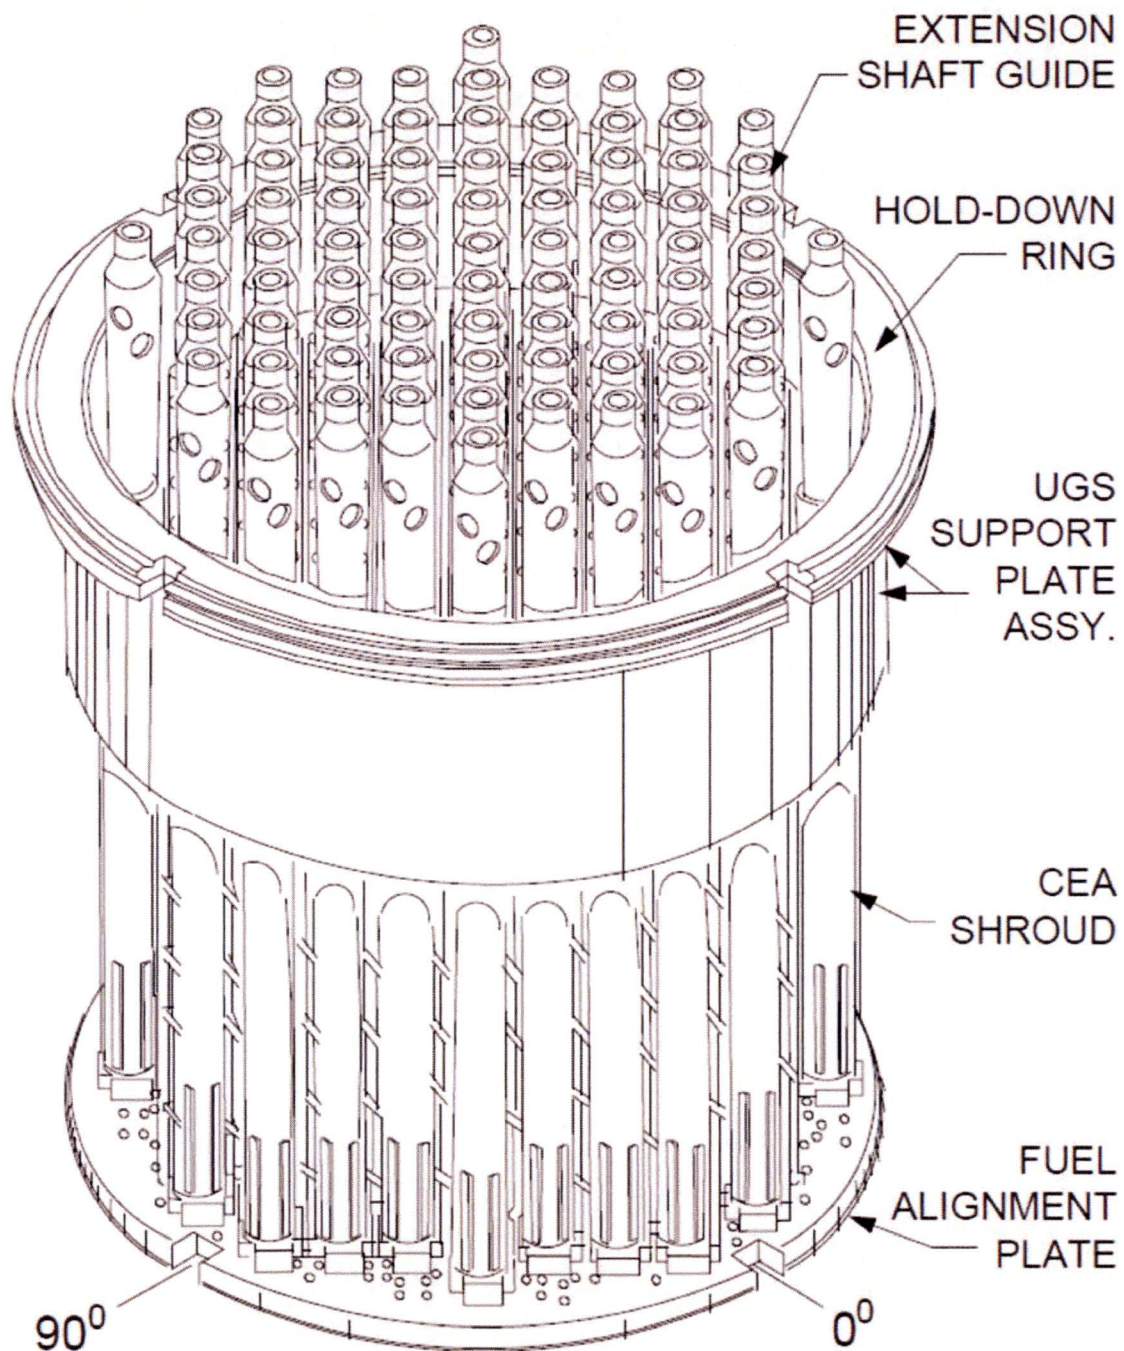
ANO-2 Upper Guide Structure Assembly [12, Figure 4.1-2]
